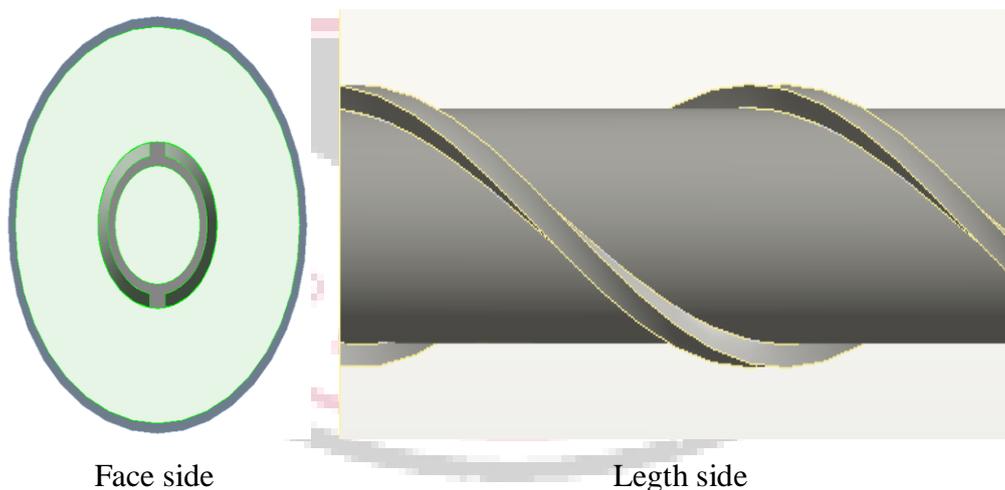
CAD geometry of double tube heat exchanger with double helical baffles
